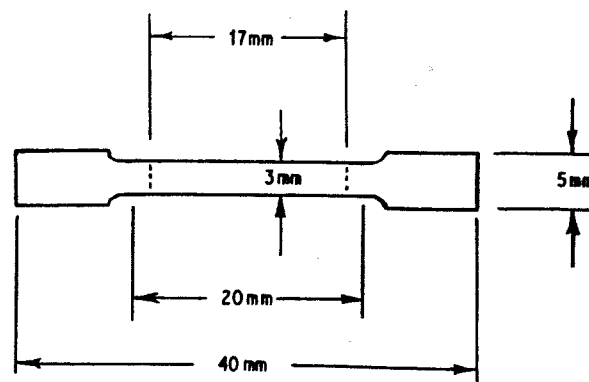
Specimen geometry for tensile testing. (---) Gauge length markings on the specimen.
